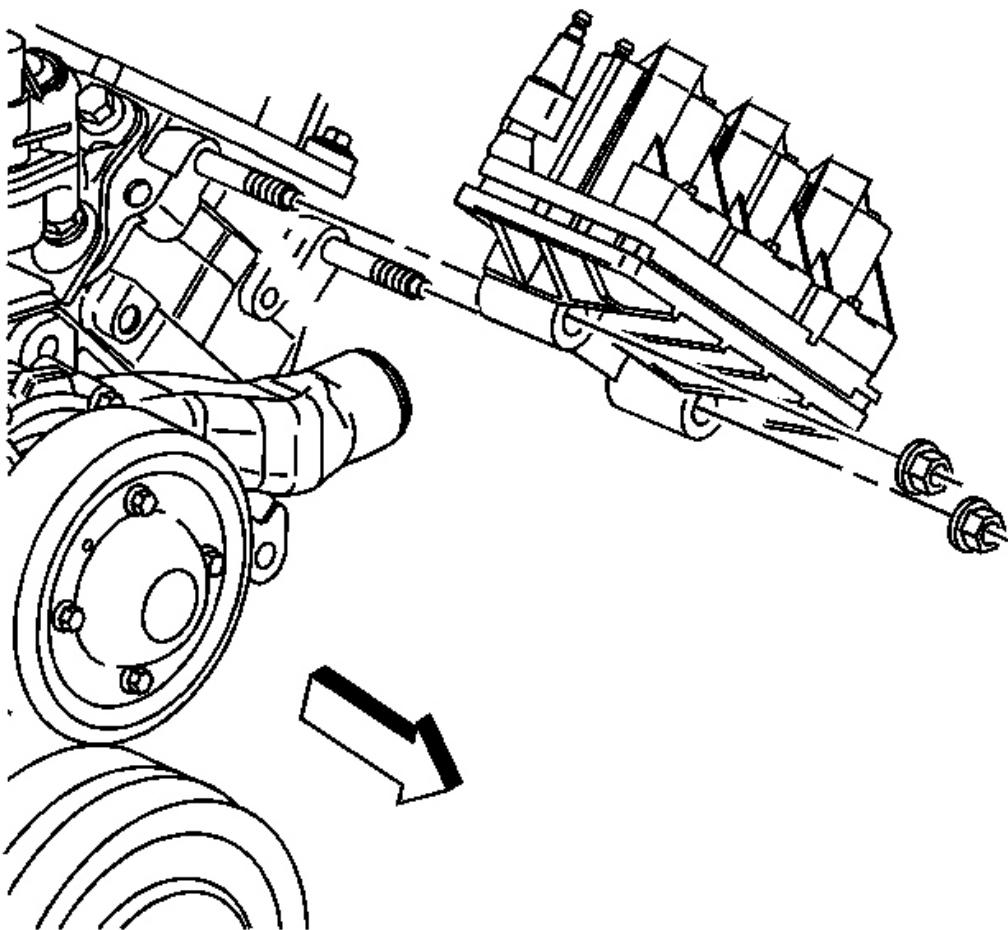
Identifying Fuel Injector Rail Bolts
